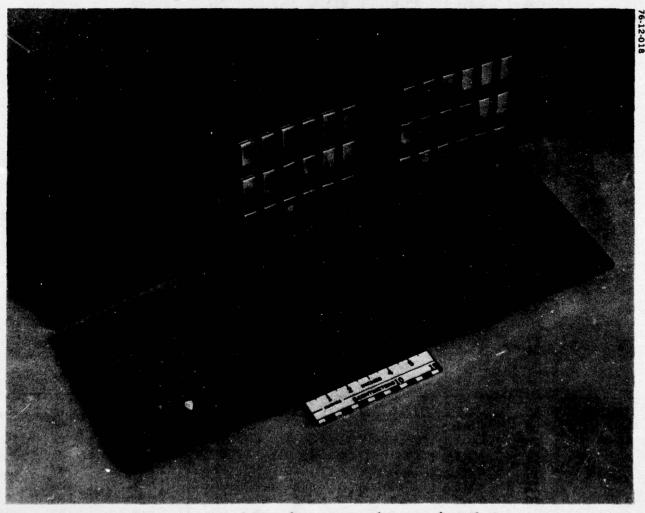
Typical Printed Circuit Board Layout for Life Test
